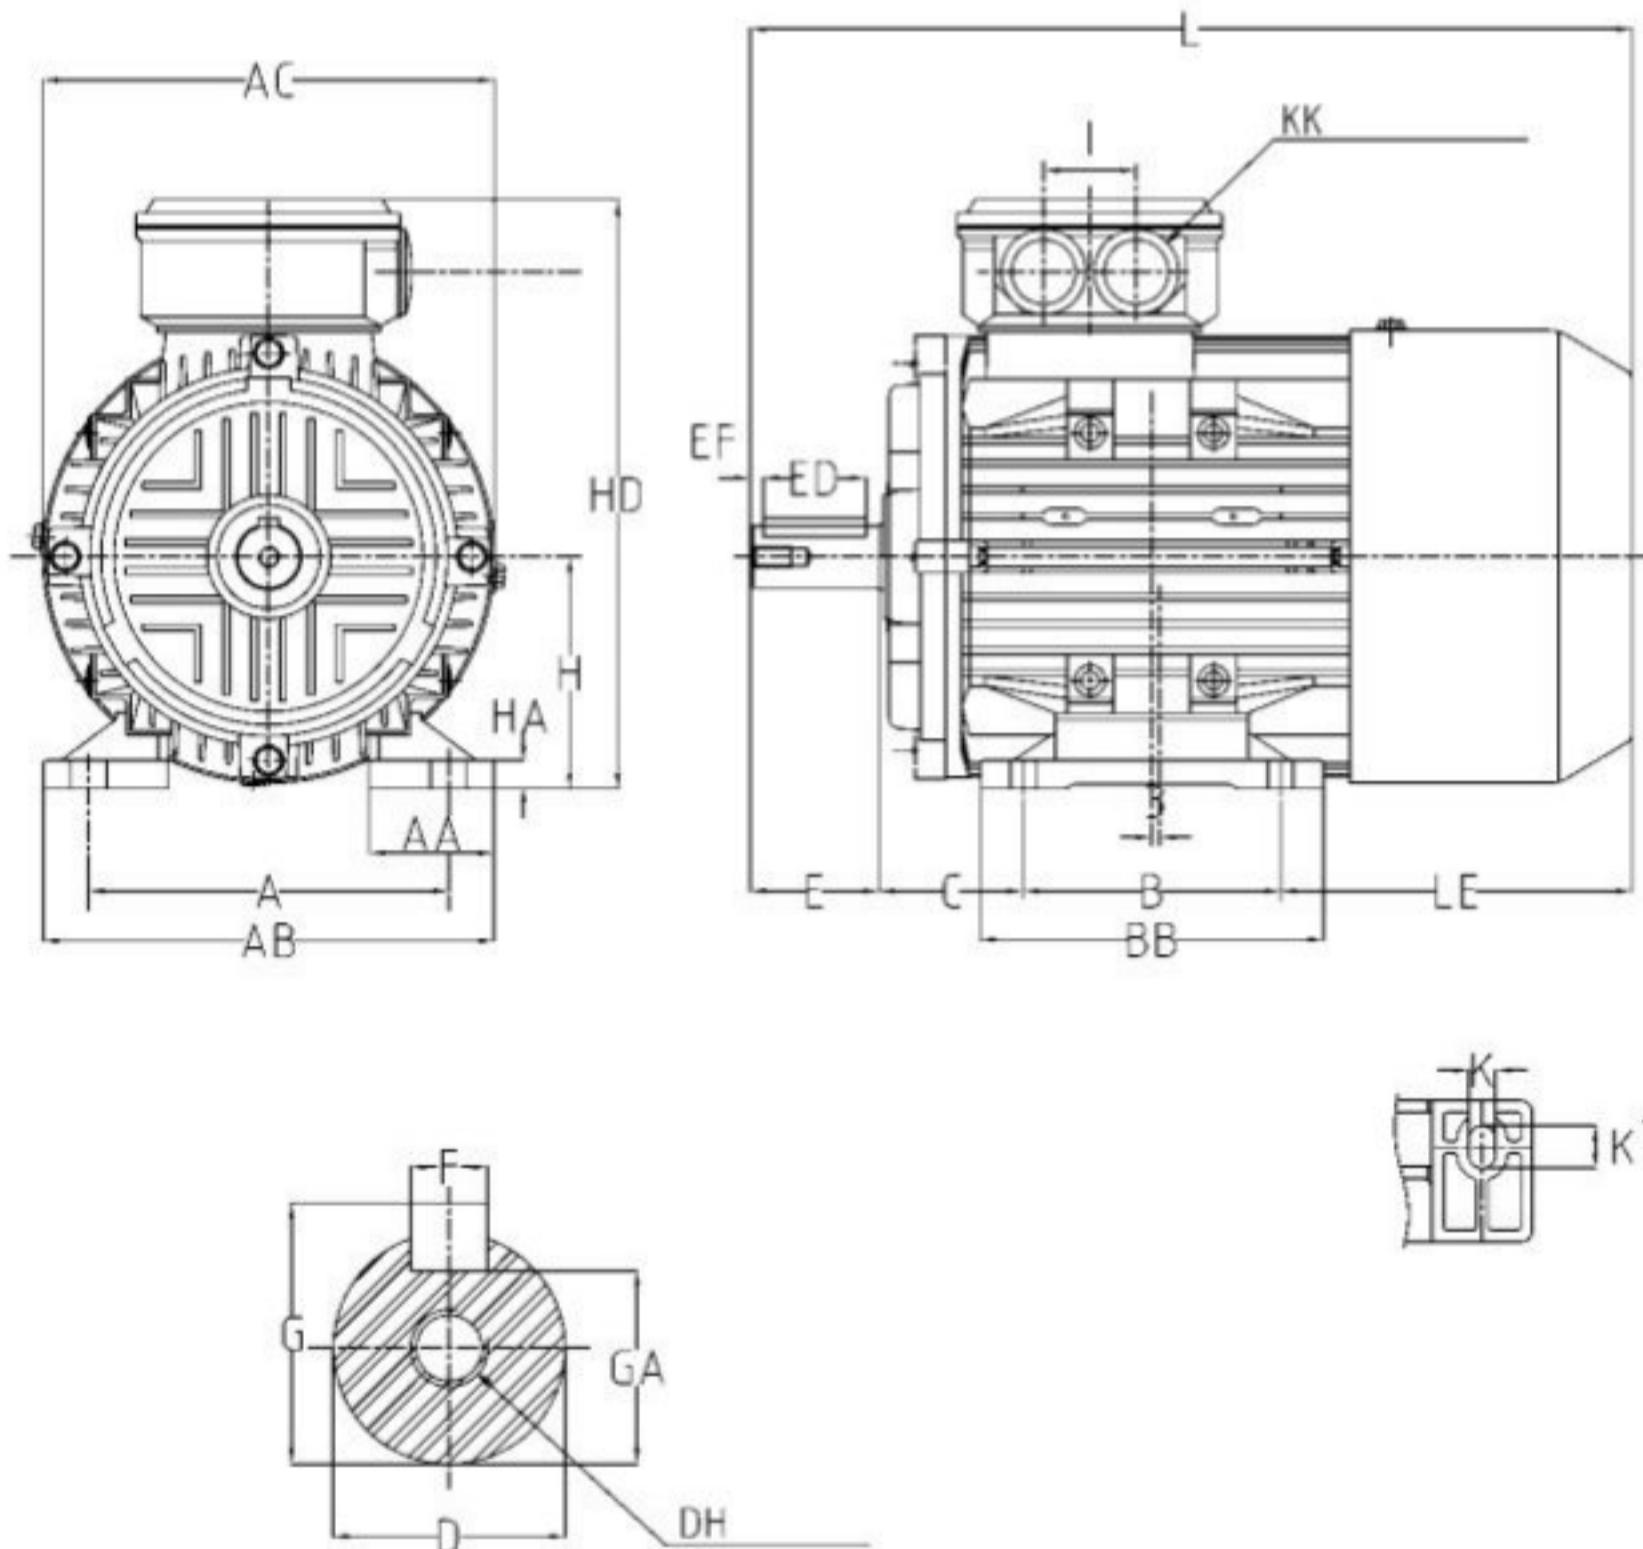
Outline drawing of aluminium design, feet version, mounting B3, frame size 63 – 160 (sample)
